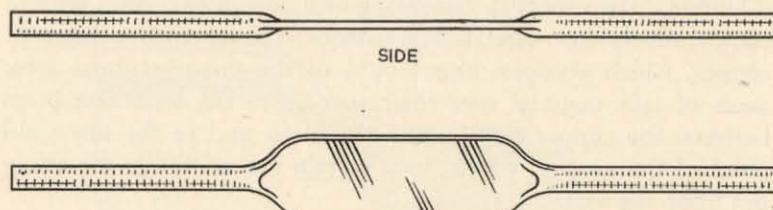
METHOD OF SEALING LARGE-DIAMETER COPPER WIRE INTO GLASS
